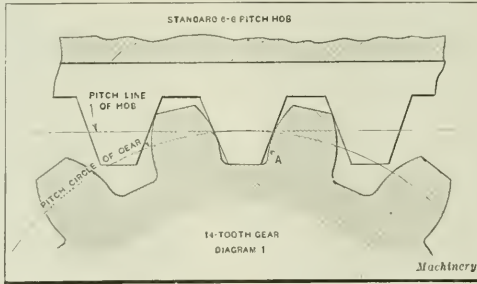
Cutting Fourteen-tooth Gear of Standard Depth without Backlash
